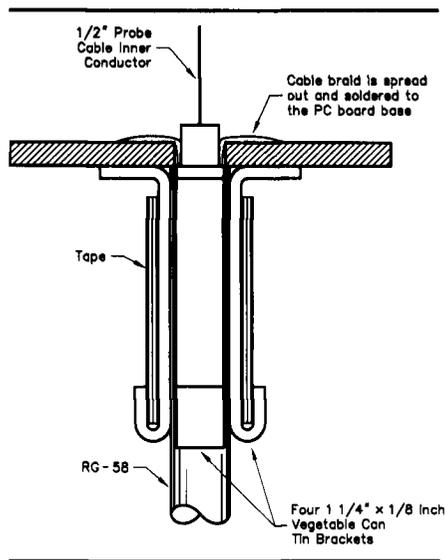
Detail of the input/output probes. The tin L brackets are held against the cable and soldered to the base. Firmly wrap $\frac{3}{4}$ inch wide tape around the brackets (about six layers), to clamp the cable in a vertical position.
